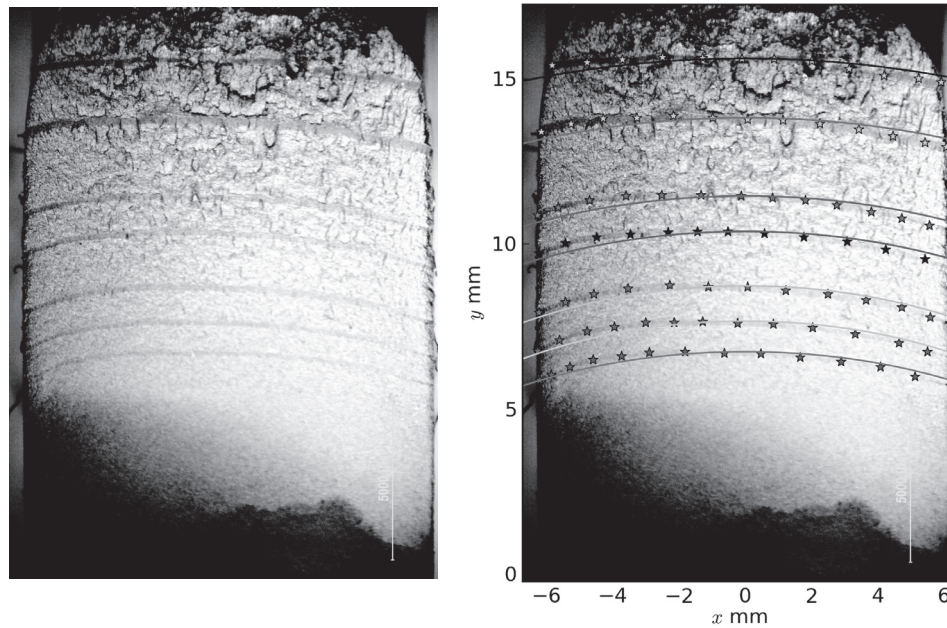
The fatigue crack surface of specimen $B=12.5$ mm, $F_{\max}=10$ kN.
